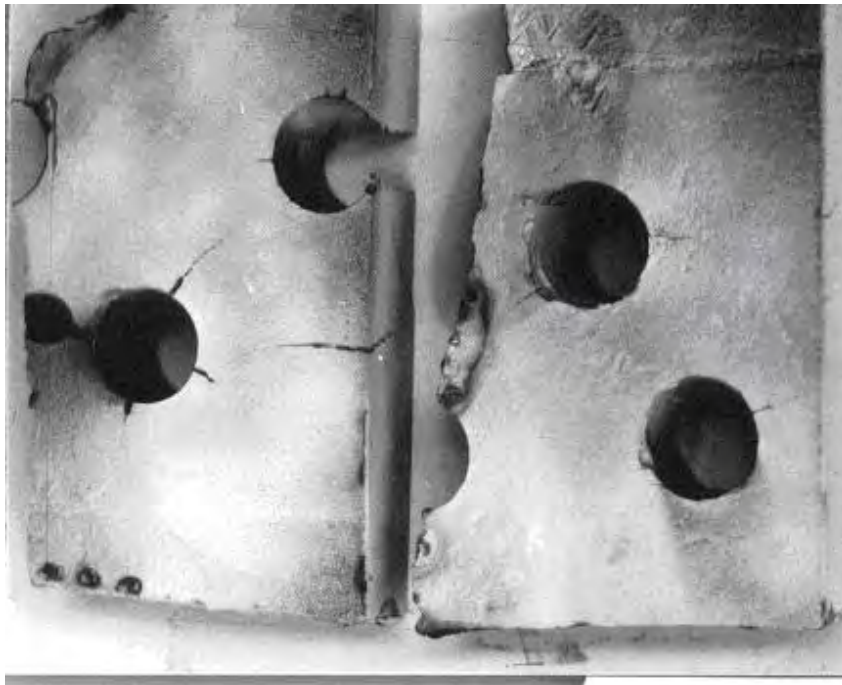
Cracking in a boiler tubesheet due to caustic concentrating between the tube and the tubesheet.
